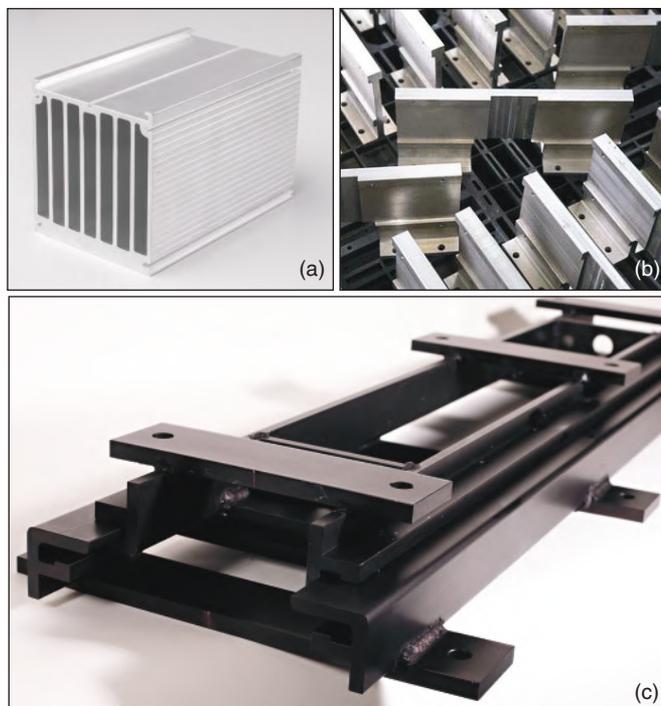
Sample components extruded at Vitex: (a) 6063 multi-port heat sink, (b) 6061 machined internal antenna station components for security detectors, and (c) a welded, machined, and anodized adjusting assembly for a basketball backboard.
